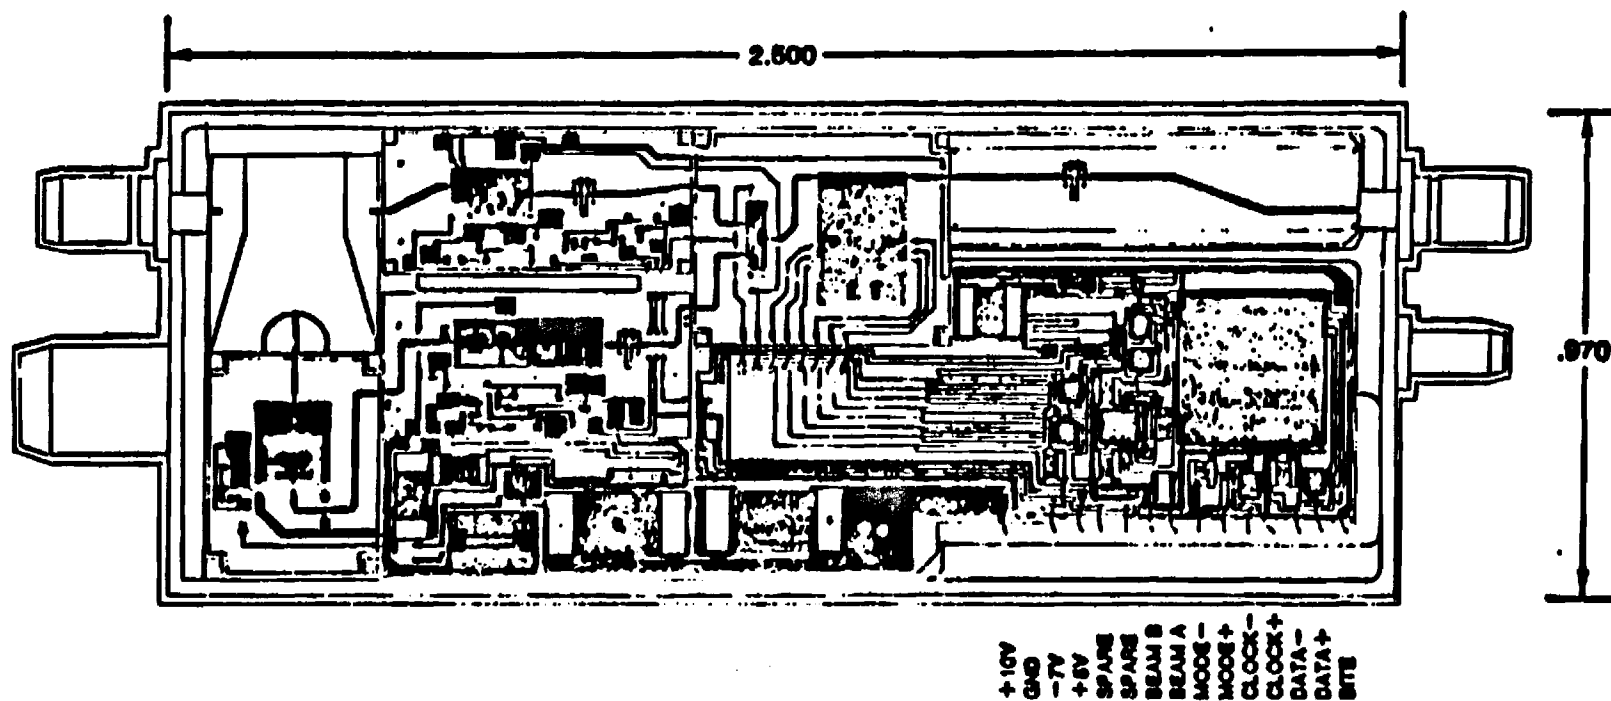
(c) T/R module top view with lid off showing MMIC and discrete component layout.
